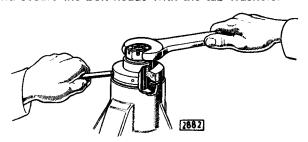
Fitting the pinion seal using Churchill Tool No. SL 4
